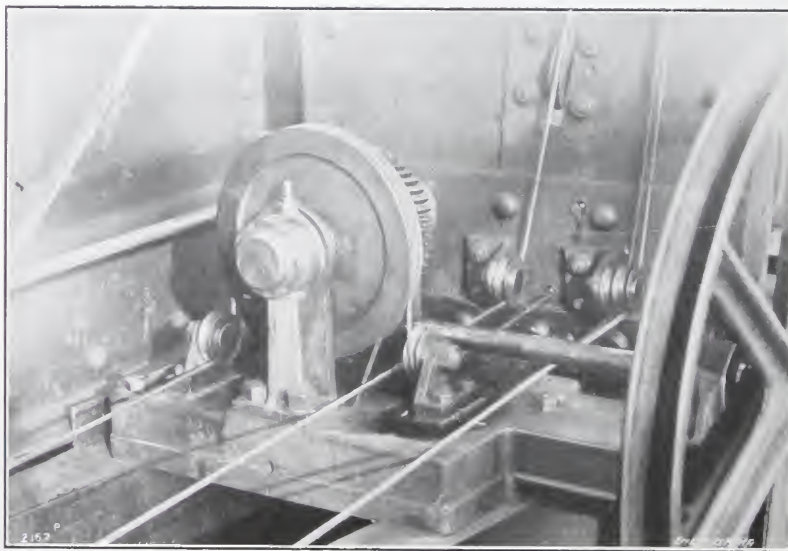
GEAR FOR OPERATING LOWER WIND SCREEN.
